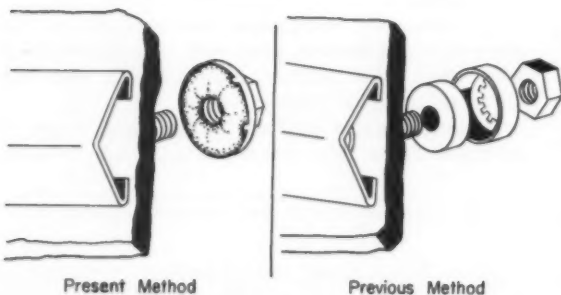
Automobile trim-molding clips with sealing mastic applied.
